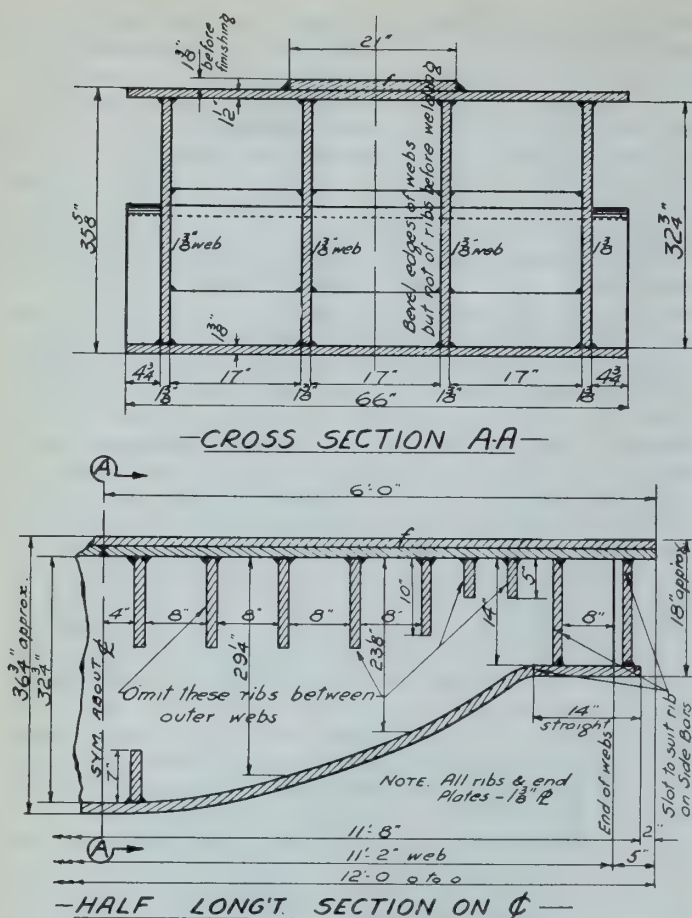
Details of welded lower strongback for 1,300-ton press.
